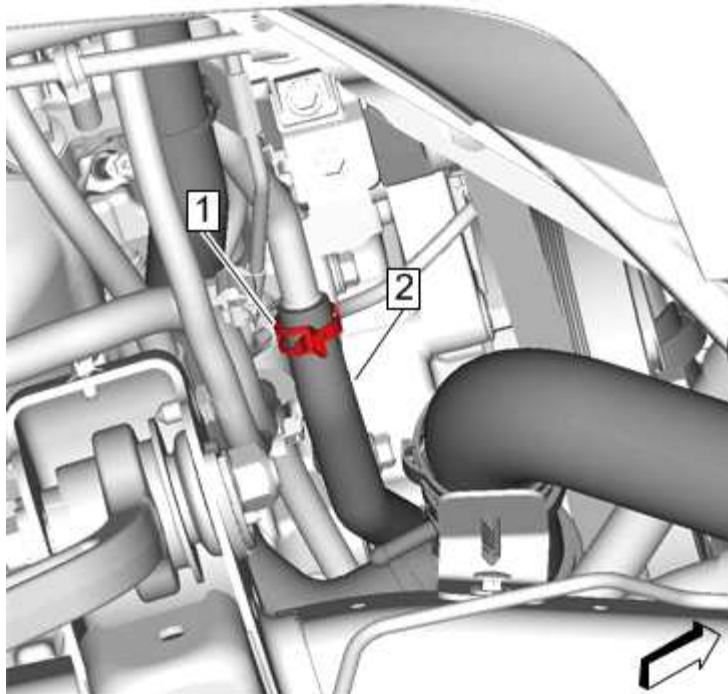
Radiator Outlet Hose And Heater Outlet Pipe
